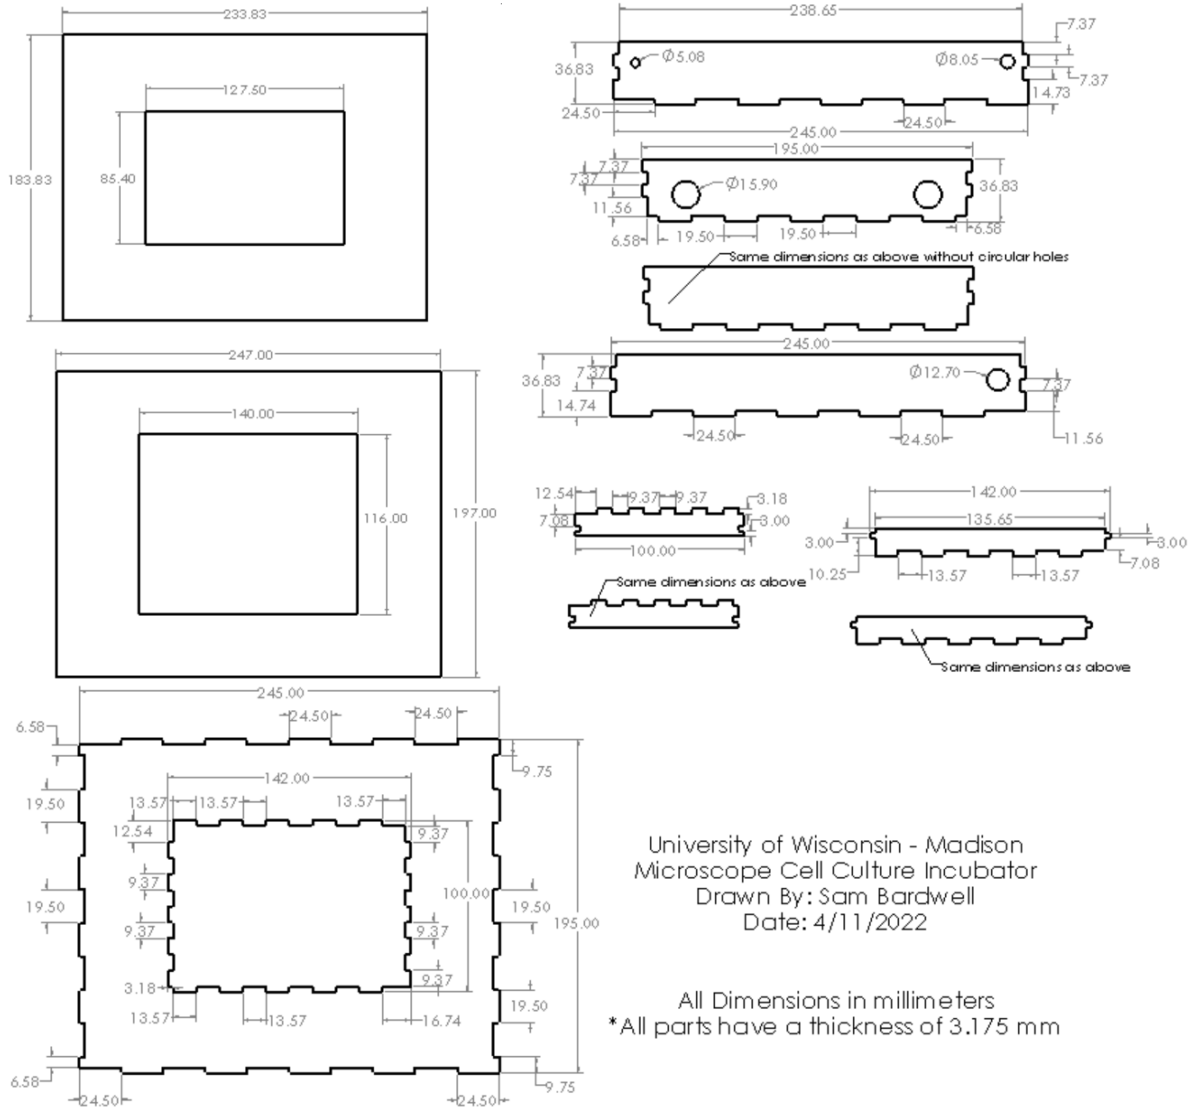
Final SOLIDWORKS drawing of the final design in mm
